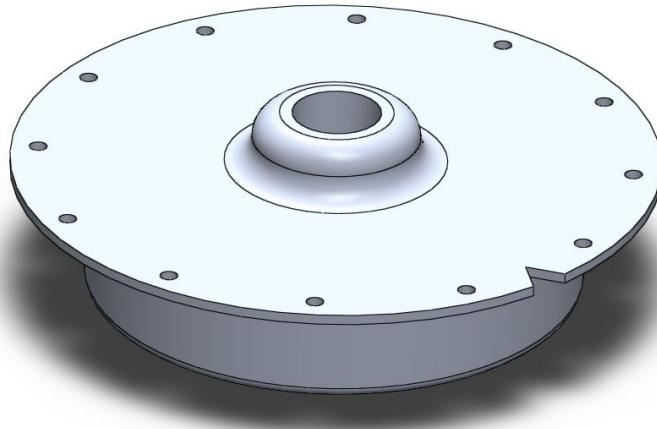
Shrink-Fit End Cap V1.0 CAD Design
